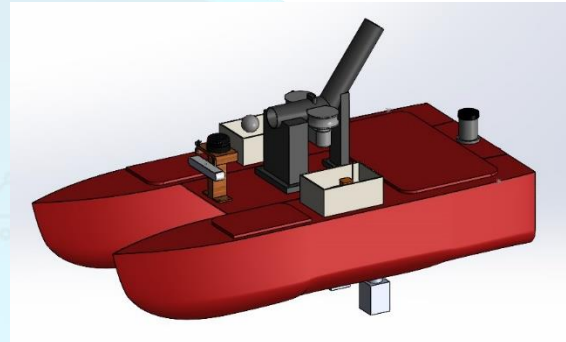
UTRAS TECHNICAL DETAILS]
